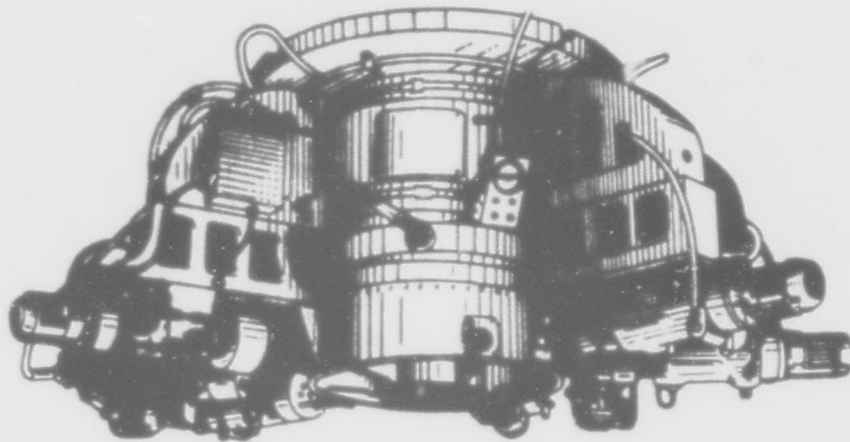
Drilling, surfacing and cutting of threads in lateral flanges and bosses of housing of a compressor on unit-head machine tool.
